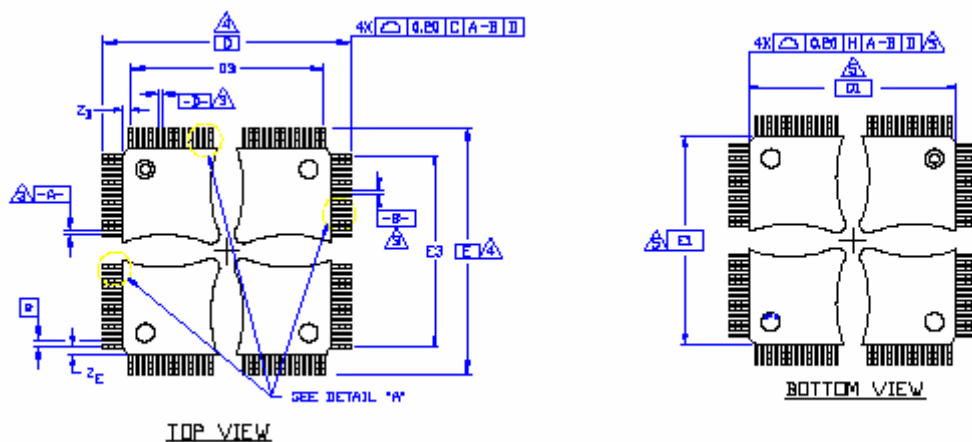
DM 256 Mechanical Design Diagram – Top and Bottom Views
